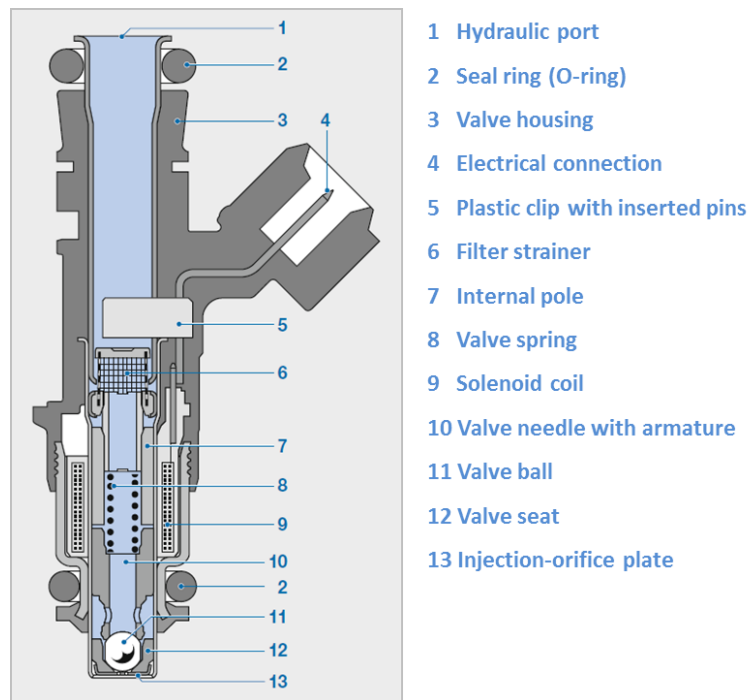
EV 14 fuel injector from BOSCH for intake-manifold fuel injection; adapted from [76, p. 112] [106]
